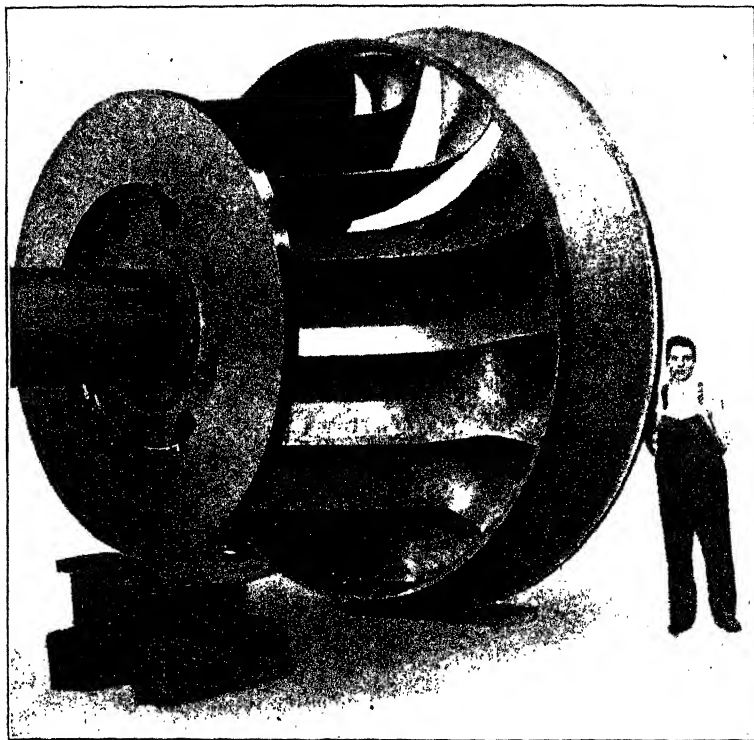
A 20,000-H.P. Runner for Laurentide Company's Turbines, made of Single Iron Casting
